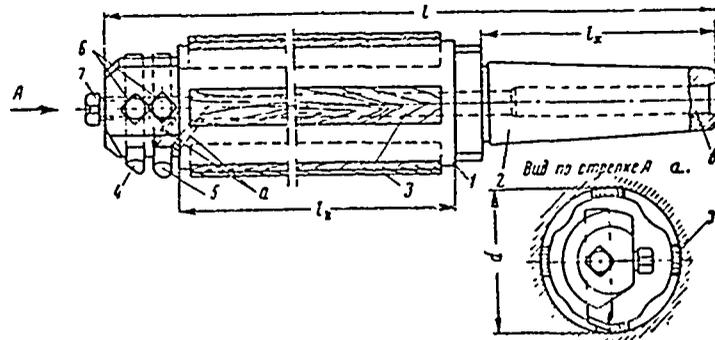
Two-cutter boring head with one-sided cutter distribution and conic tail
